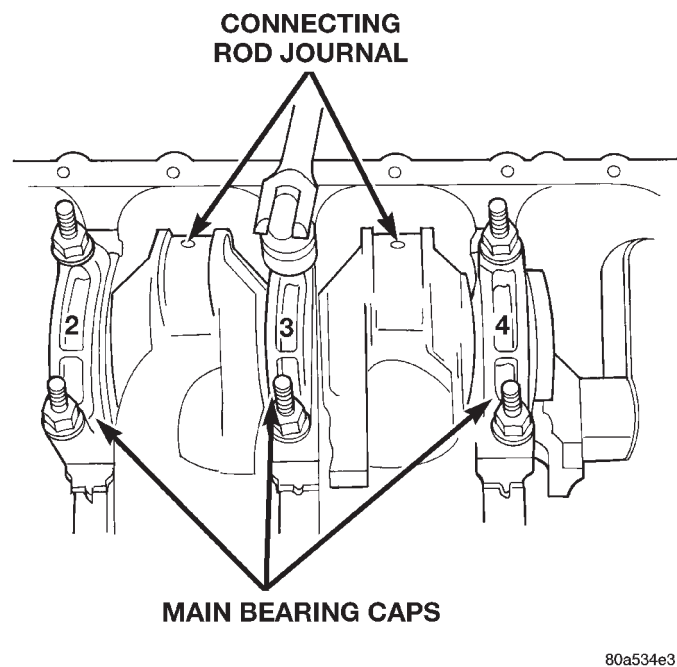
Removing Main Bearing Caps and Lower Inserts
